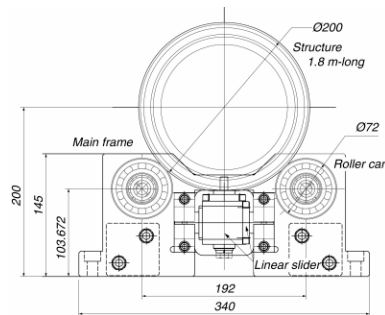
A cutaway drawing of the roller cams mover unit. 72-mm diameter roller cams give an adjustable range ± 1.4 -mm.
